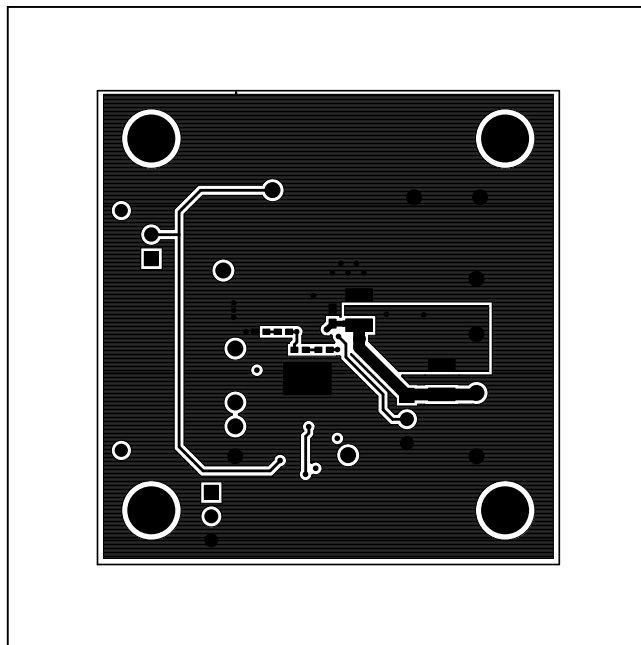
MAX16936 EV Kit PCB Layout—Solder Side
